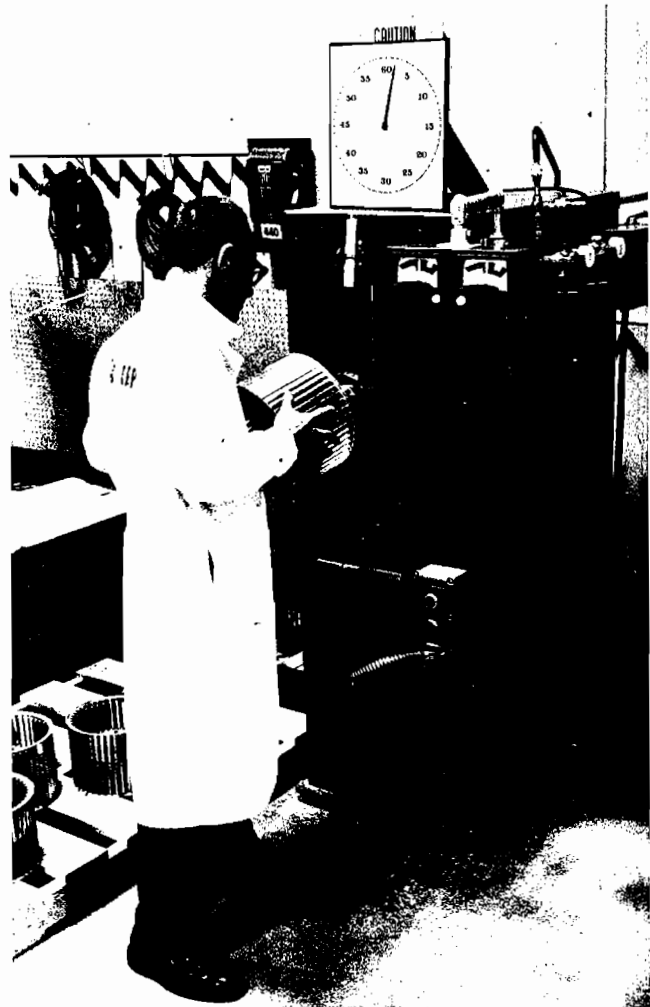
A Production Balancing Machine is a Manufacturing Tool for Balancing Large Quantities of Parts.
